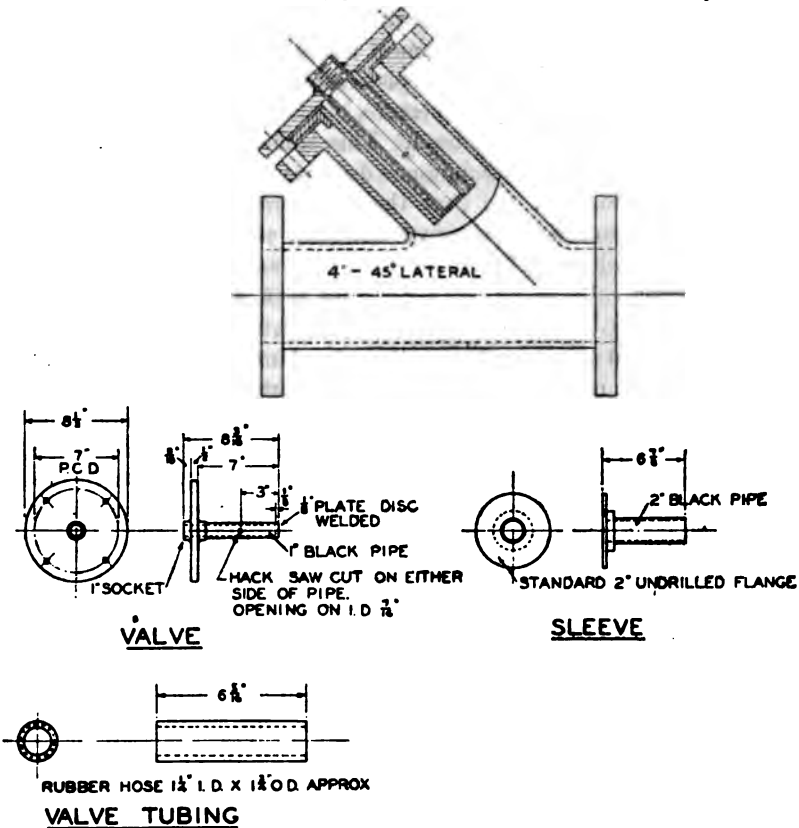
Non-return valve for compressed air into 4-in. sand line.
